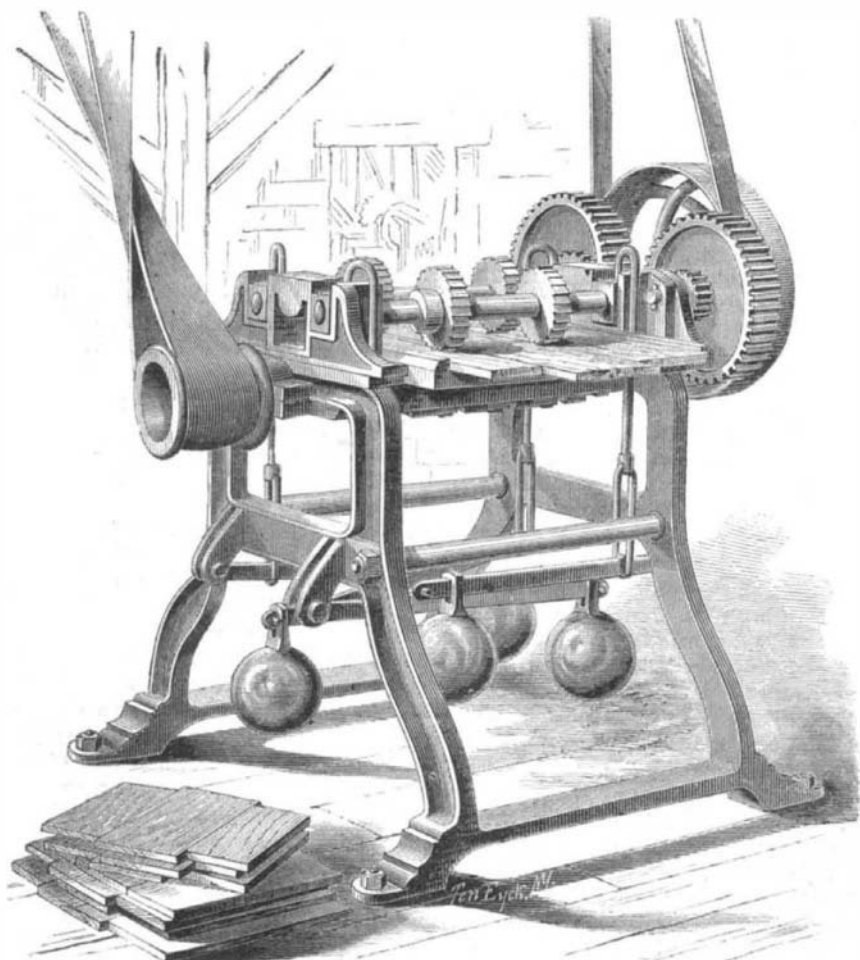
MACHINE FOR DRESSING BARREL HEADS.
